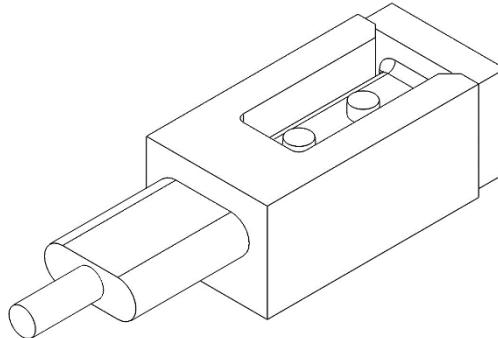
Wrenching Strength Test with Cable in Fixture
